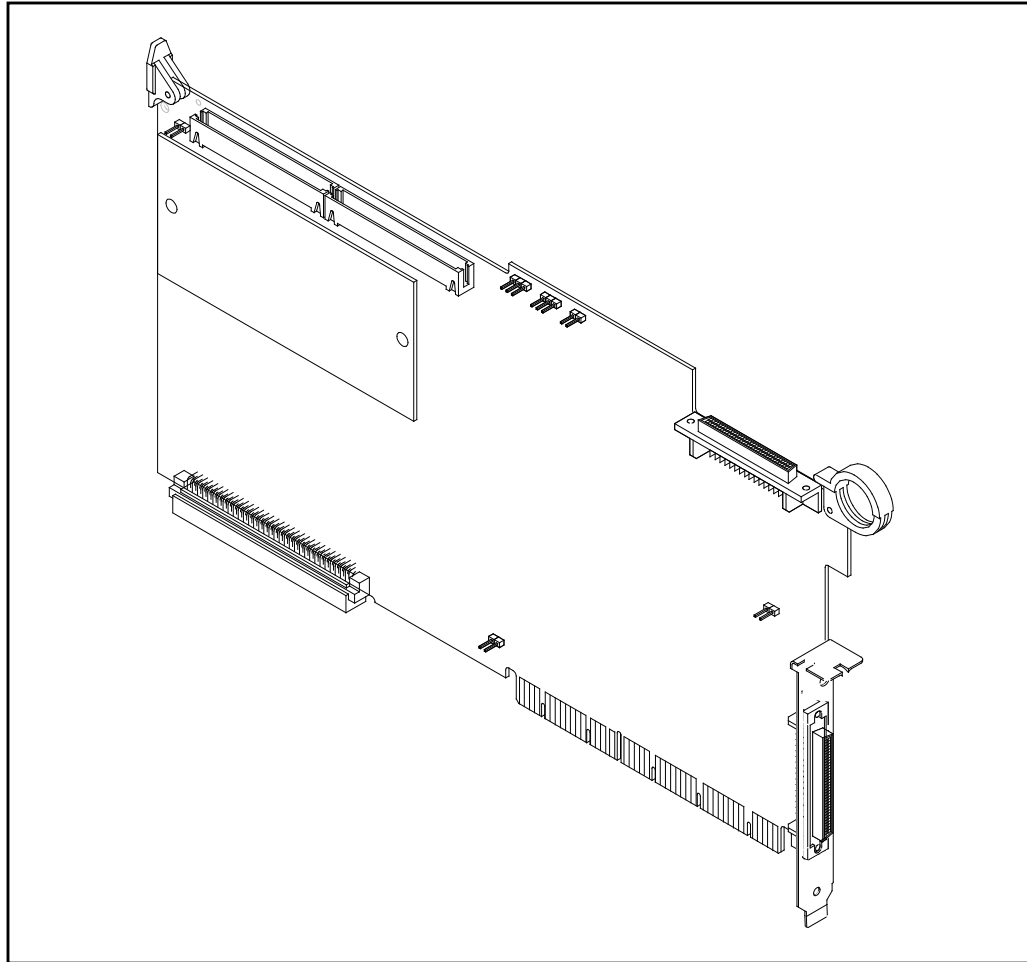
Slave Disk Recorder Circuit Board Showing Square Pin Test Points
